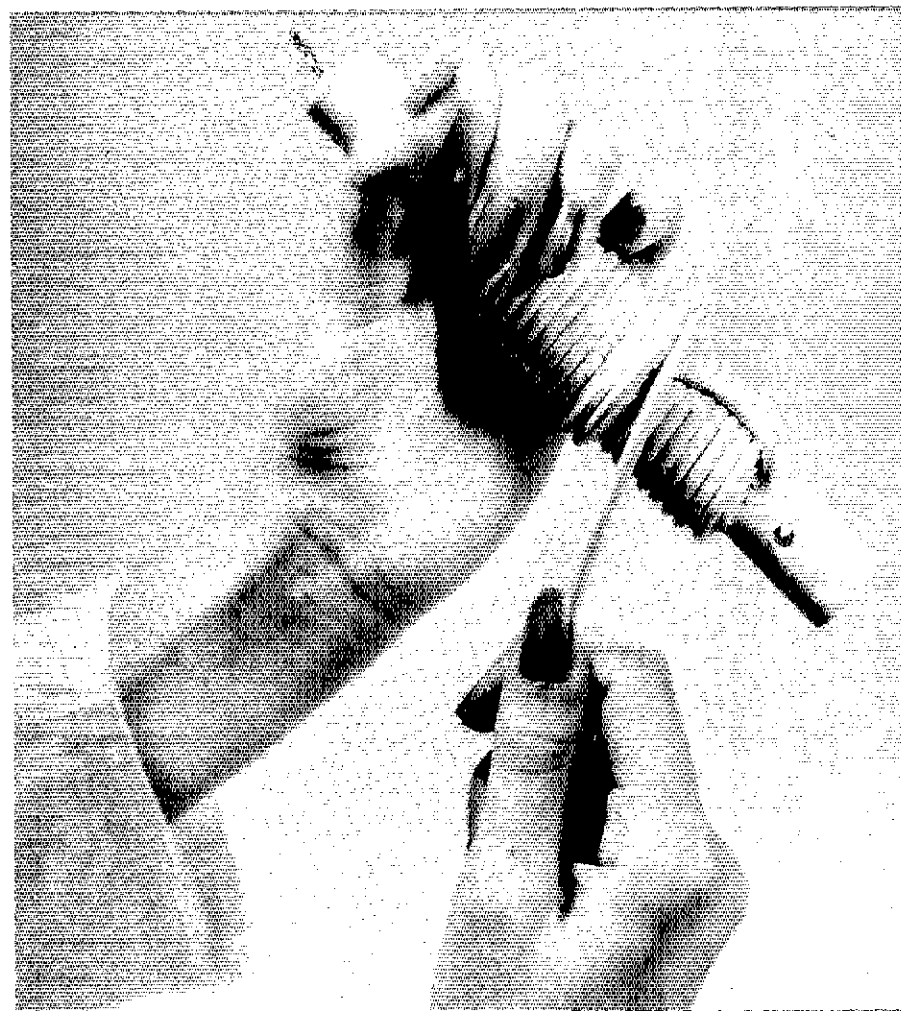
The third-layer coil winding technique for a 40/15-meter trap. This coil is wound on top of the wire lying over the second-layer coil.
